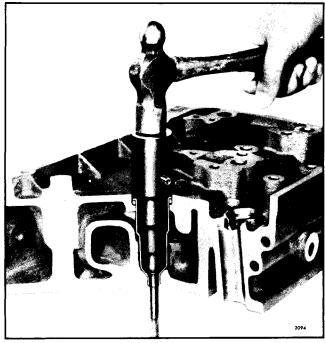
Installing Injector Tube using Tools J 5286-4A and J 5286-5
